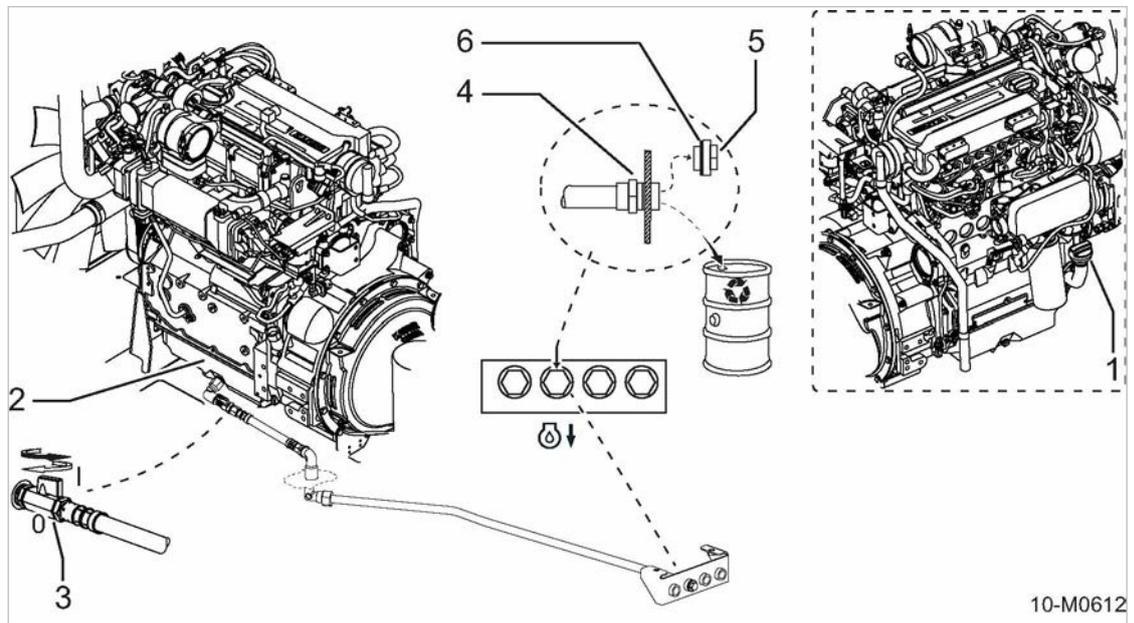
Draining the engine oil (sealed floor pan - stationary machine)
